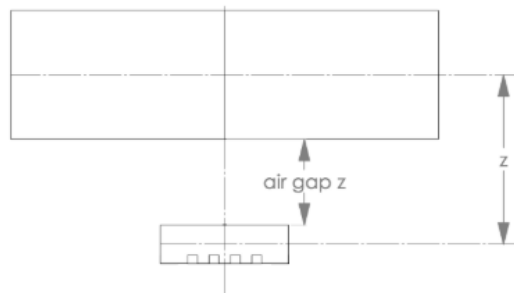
Magnet and Sensor Side View Showing “z” Dimension
